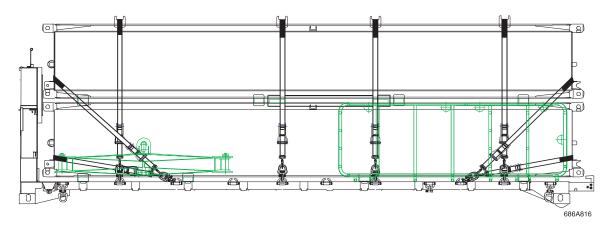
71 Flatrack Load LVT Lashing Arrangements
